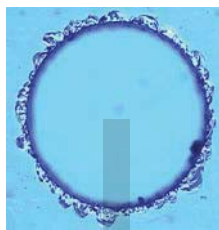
Edge chipping produced on soda lime glass during drilling using DCD
